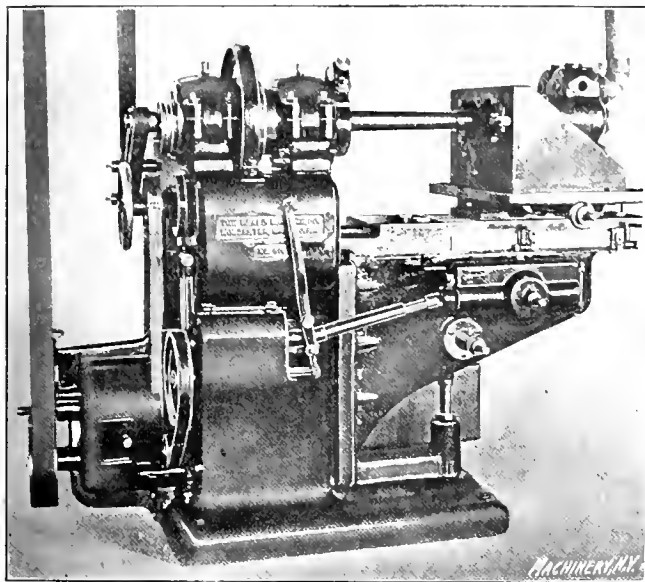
Heald Grinder used in Premier Factory, showing Exhaust Attachment for Drawing off the Iron and Emery Dust
